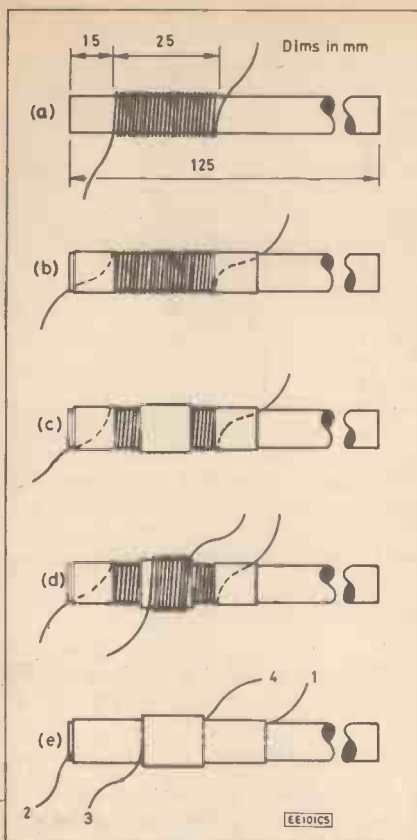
Winding details for the ferrite rod RF transformer.
